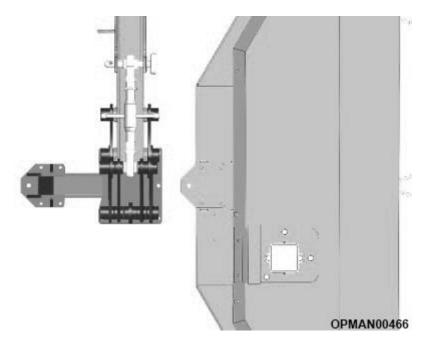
Line Up Holes On Cutting Unit
